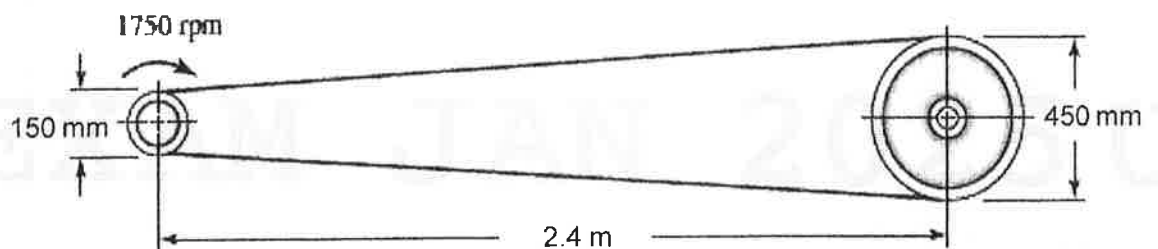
(a): Flat belt drive system (Drawing is not-to-scale)
